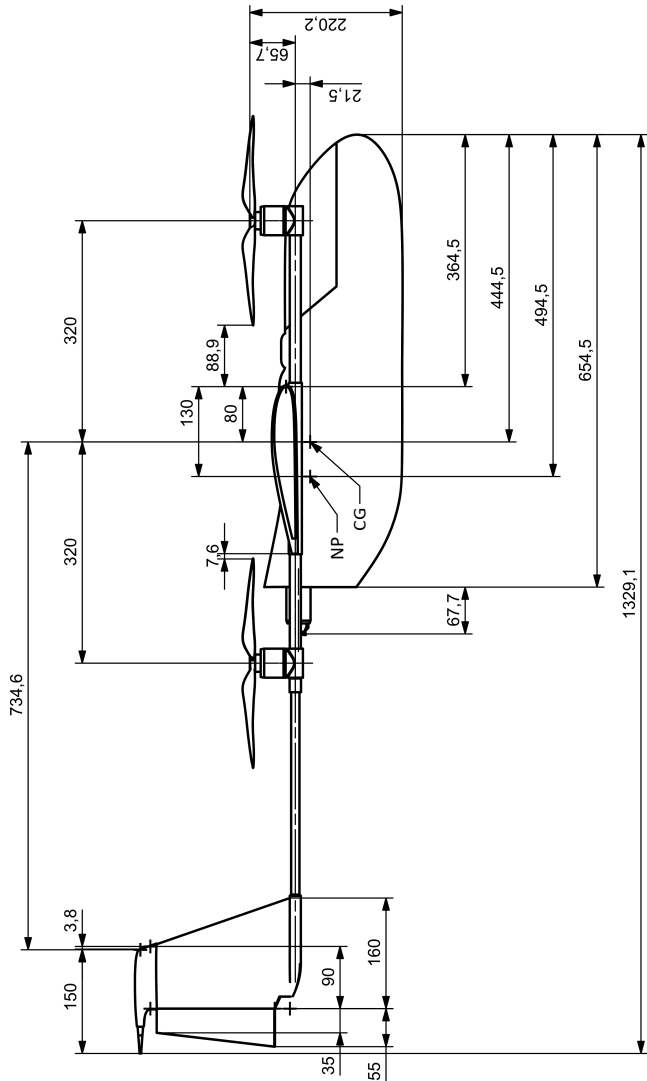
Technical drawing of the hybrid Scihunter UAS, side view [Frö+19]
